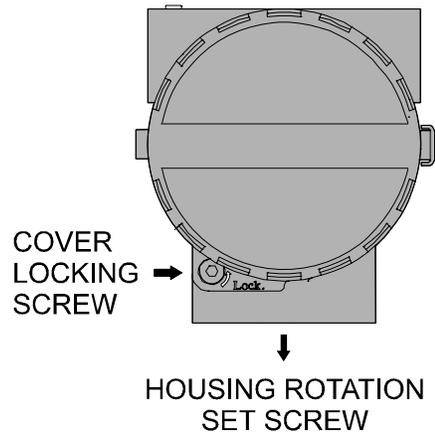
Housing Adjusting Screw and Cover Lock
